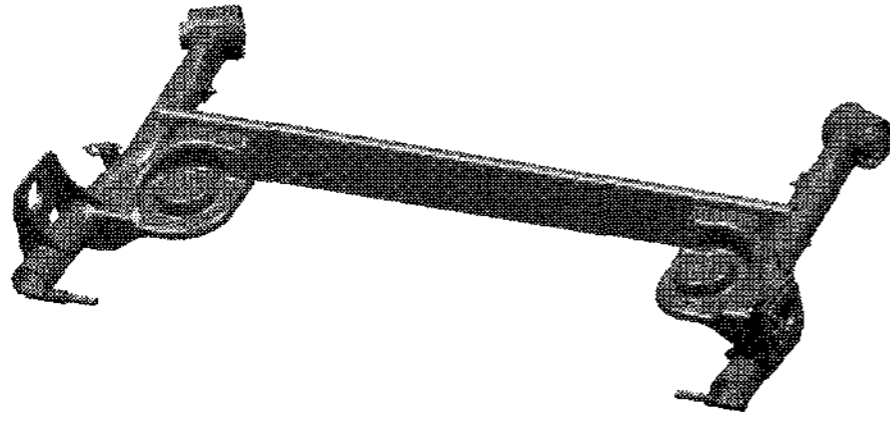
Beam type CTBA with the stamping process of a single thick sheet metal
